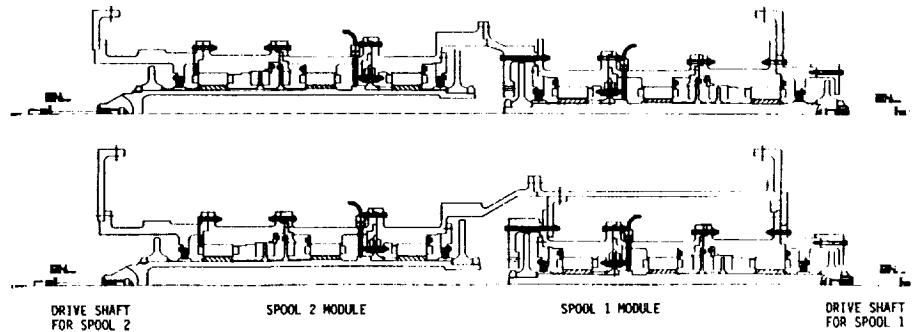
GE Twin Spool Magnetic Bearing Test Rig Configurations
